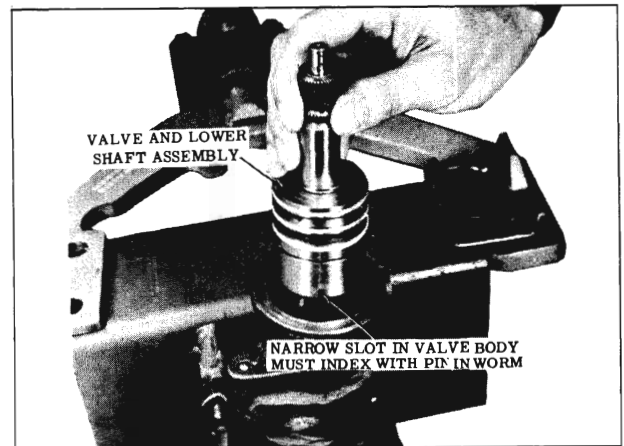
Installing Valve and Lower Shaft Assembly
